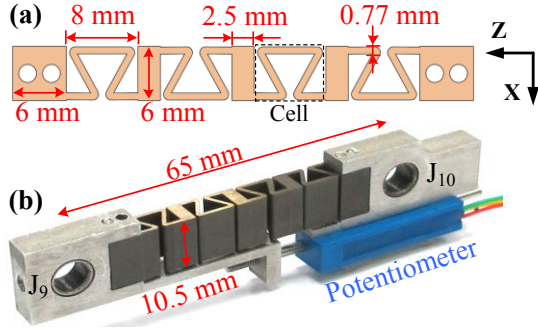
(a) CAD model of the compliant coupler (b) Assembled view
